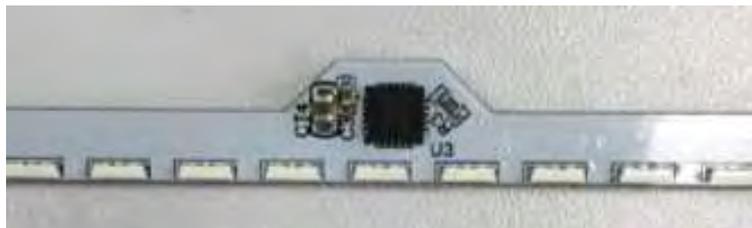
Macroblocks' QFN Packaged IC & Latest 3806 LEDs
